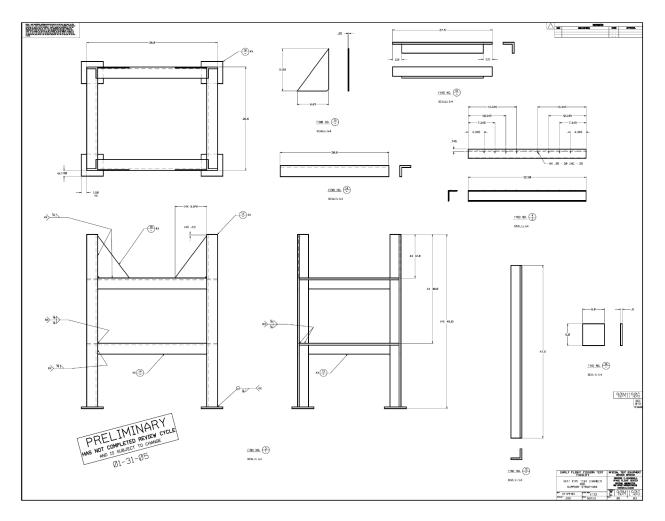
Detail test chamber support structure (Dwg. No. 90M11906).
